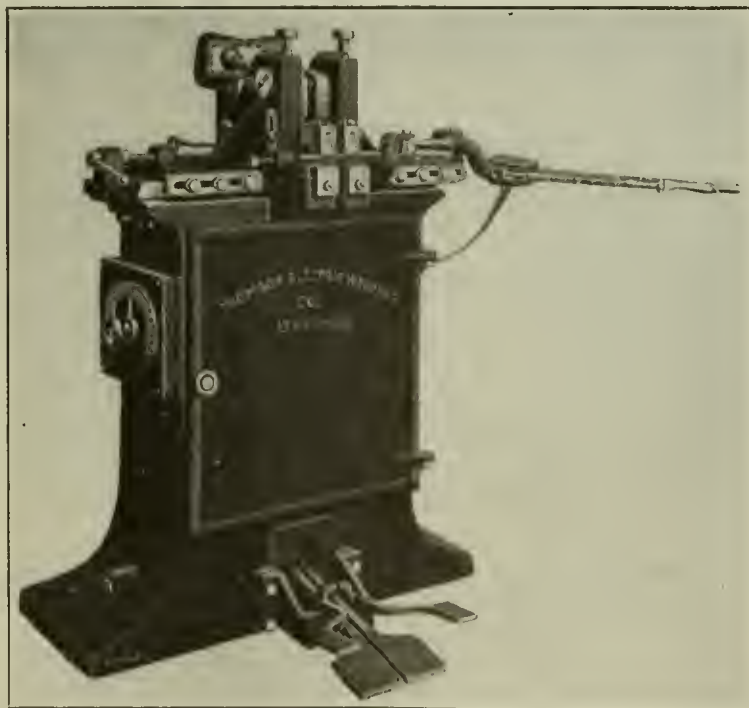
BUTT WELDING MACHINE CAPABLE OF WELDING STEEL PIECES UP TO 0.5 SQ. IN. CROSS-SECTIONAL AREA
